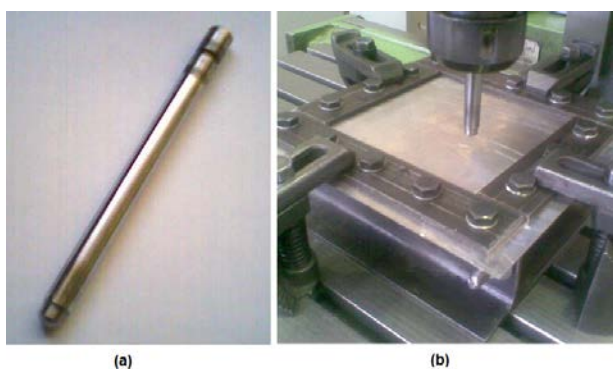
(a) Hemispherical tool, (b) Experimental Setup for SPIF
